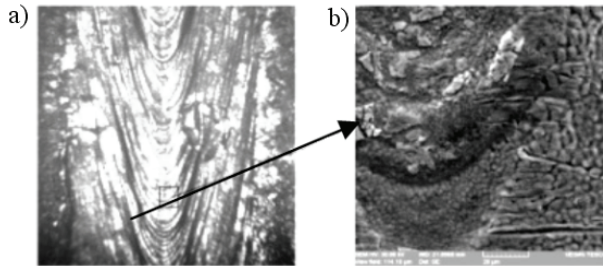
Surface structure of the untested weld line: a) mag. 400 \times , b) mag. 2500 \times
